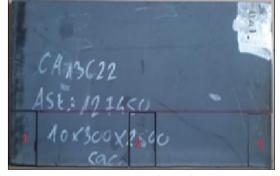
Cutting arrangement of samples: "1" specimen - start of cutting, "2" sample - middle of cutting, "3" sample - end of cutting
